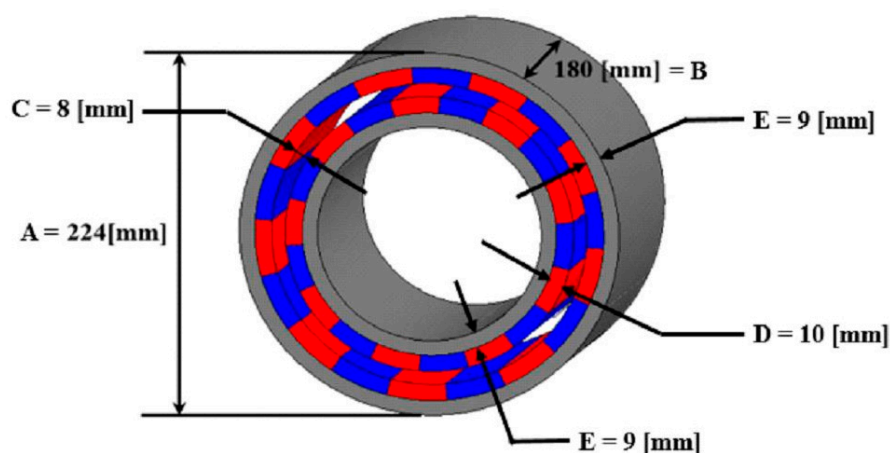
Final Design parameters of the 10 kW Magnet coupler. The dimensions from Table 6 are labeled here.
